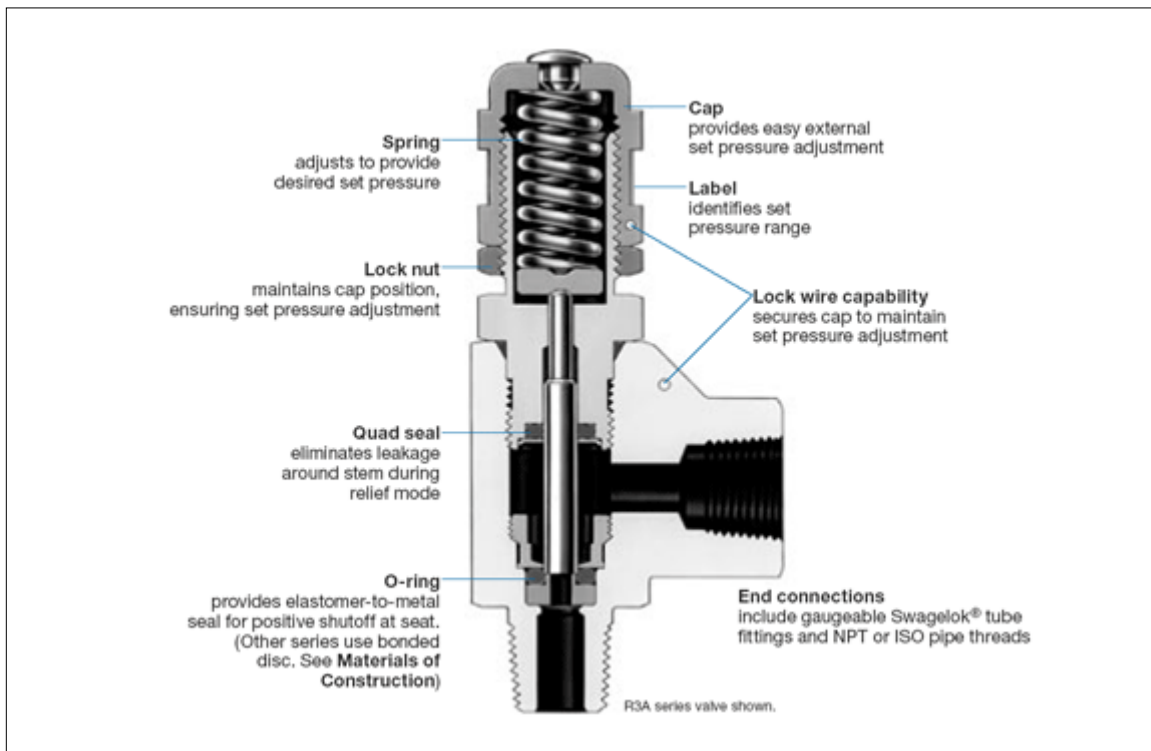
Sectional view of the PRV used in the GDI system of the prototype engine [13]
